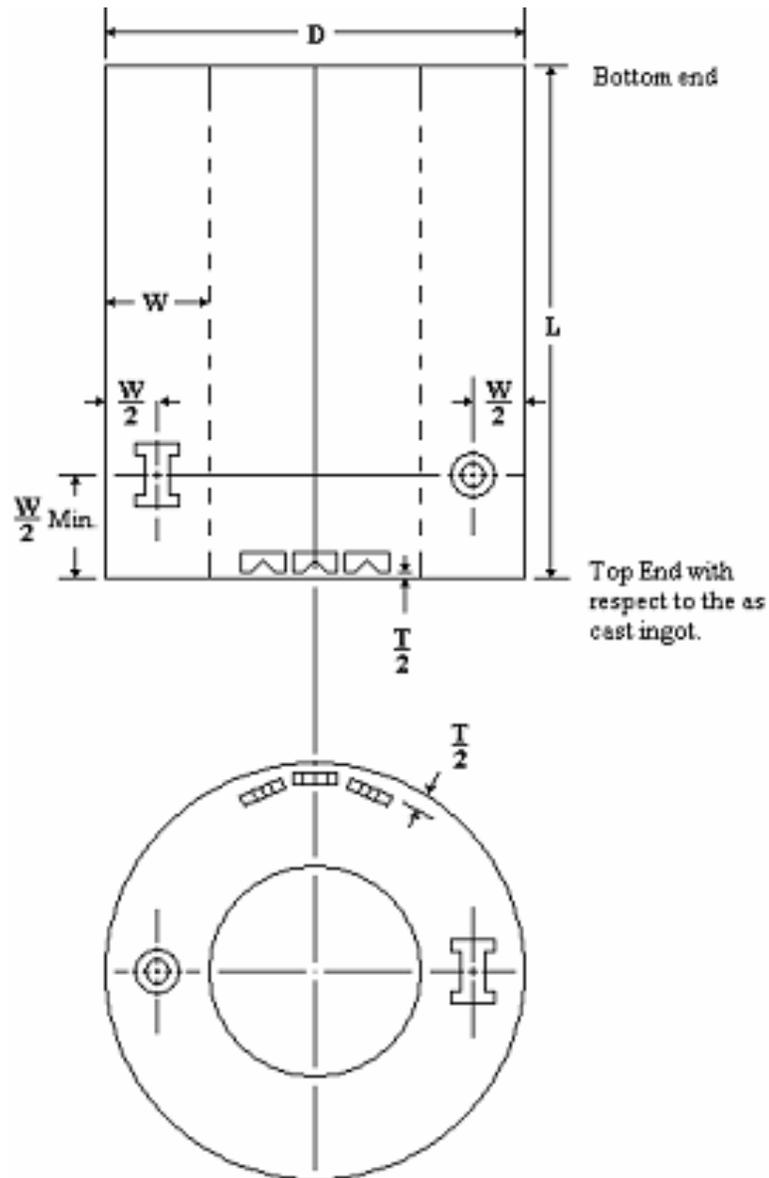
Typical schematic diagram of test specimen location for an 8-inch thick HY-80 forging of bored circular cross section. (See E.4.3.1.4 and E.4.4.3.2 for details on specimen locations.)
